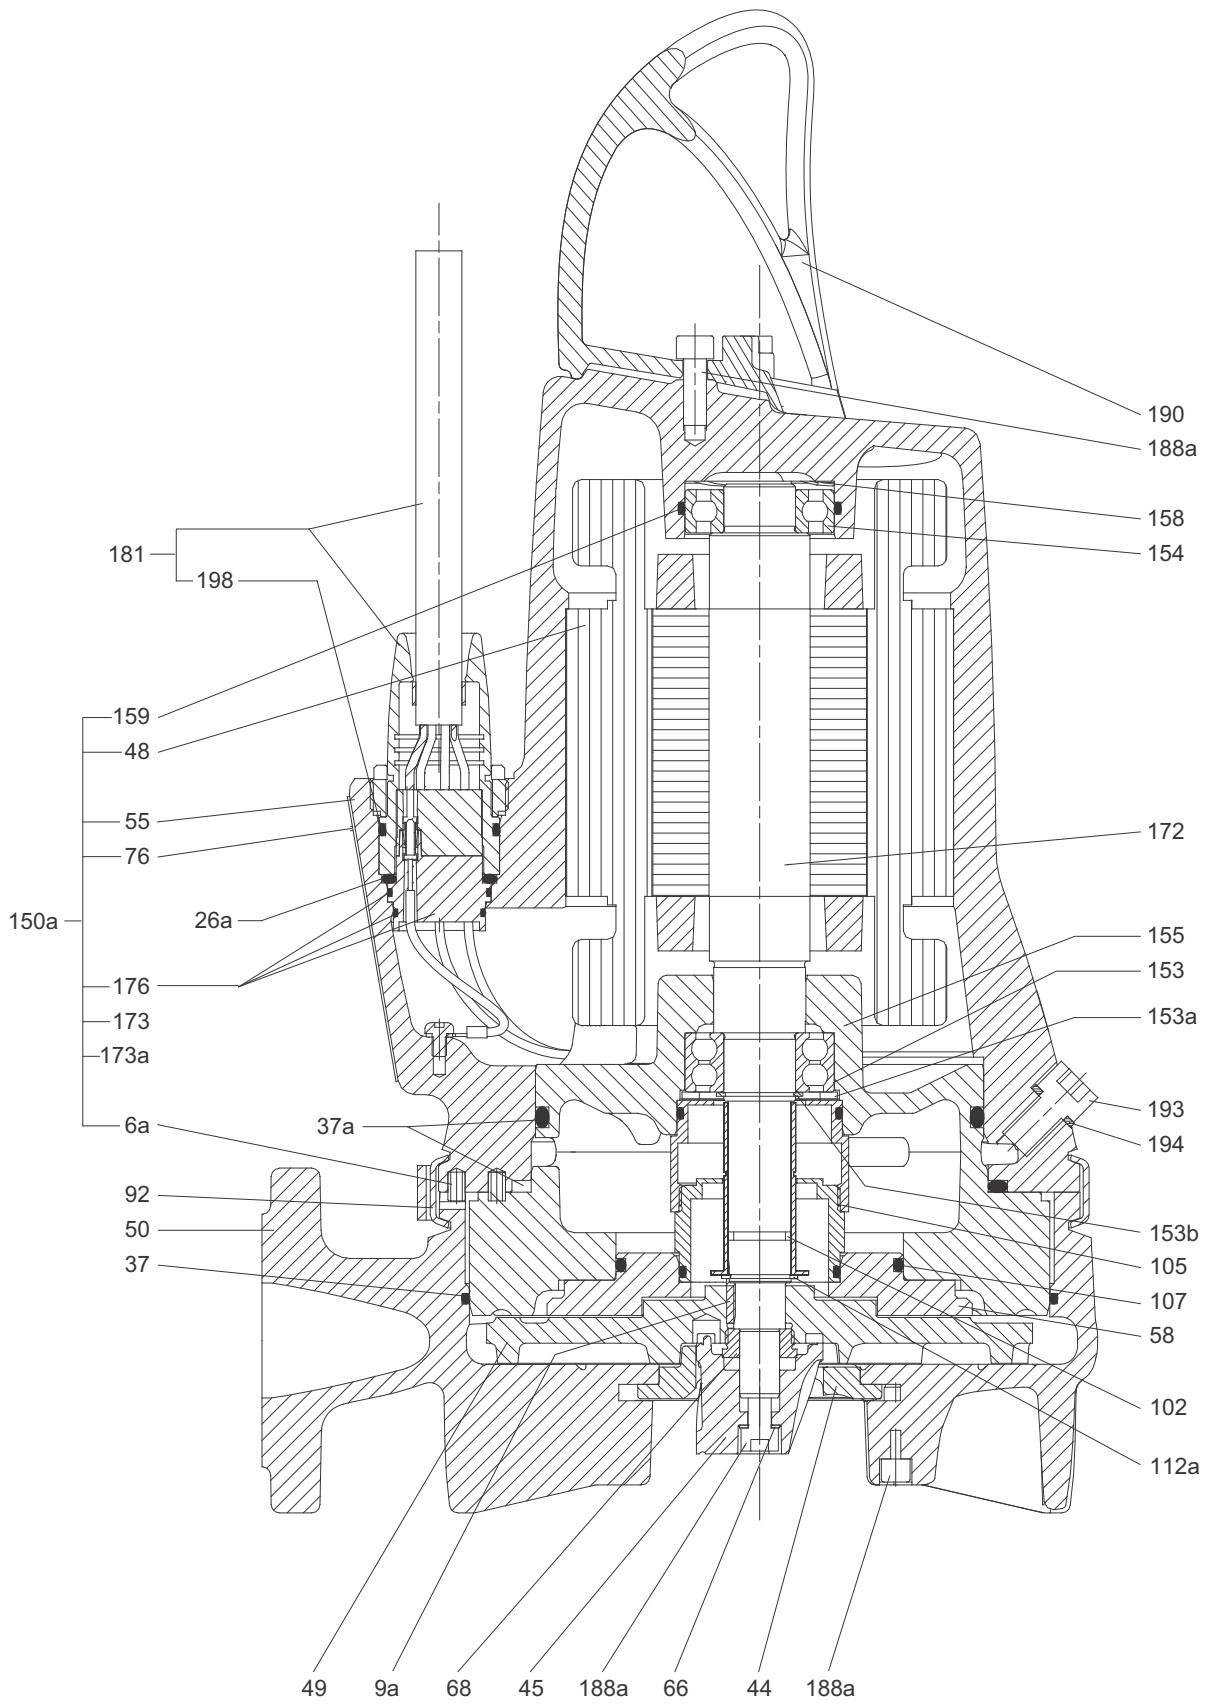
Exploded view of SEG pumps, 0.9, 1.2 and 1.5 kW
